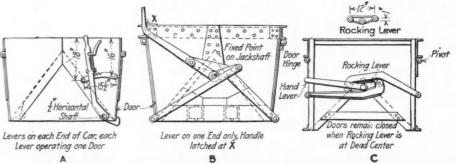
EXAMPLES OF SIDE-DUMP DOOR LOCKS FOR HAULAGE CARS
